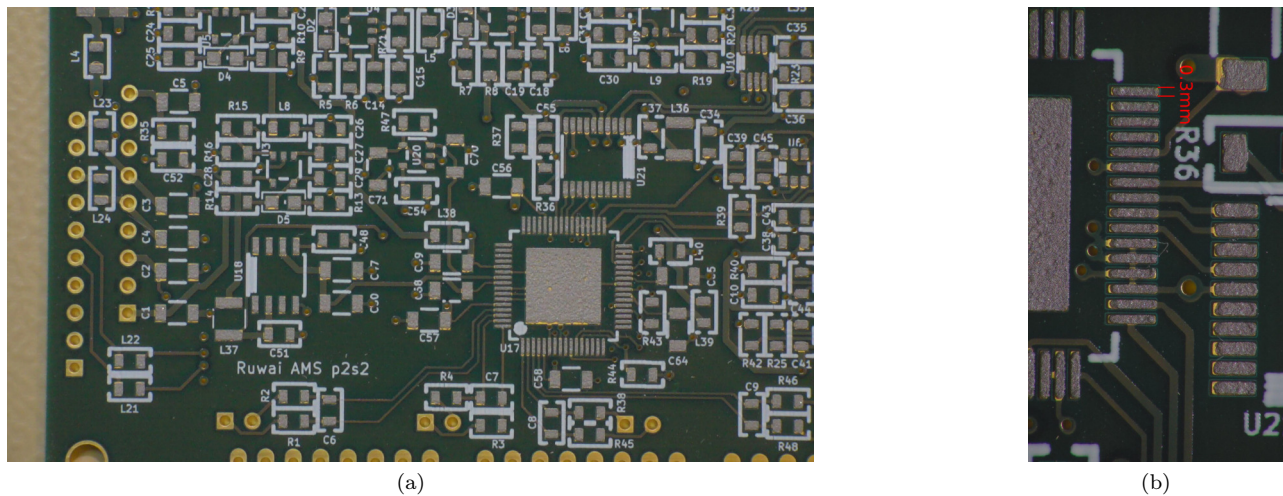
The solder paste applied to the PCB (a) and a close-up (b).
